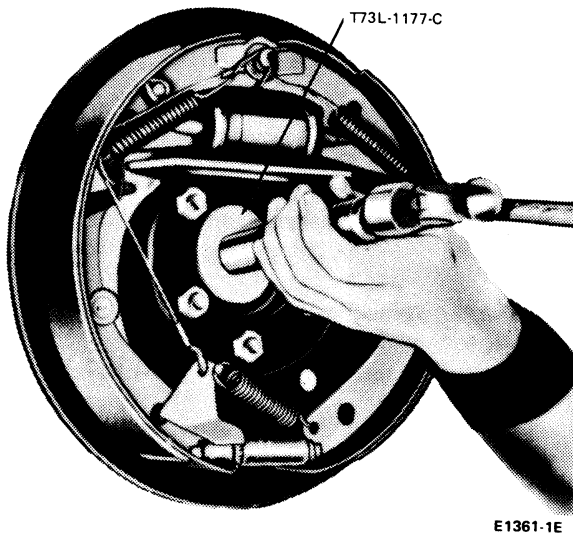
Installing Rear Wheel Bearing Oil Seal
